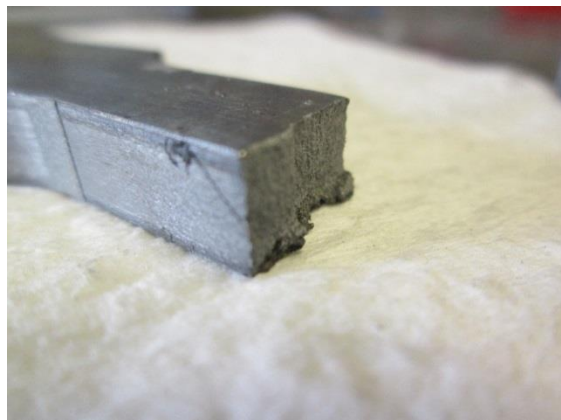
Failure of Specimen 5 Begins from Pitting Outside Fracture
